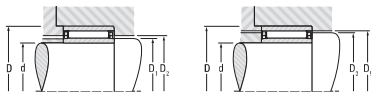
Guidance in the housing (left) and on the shaft (right)
